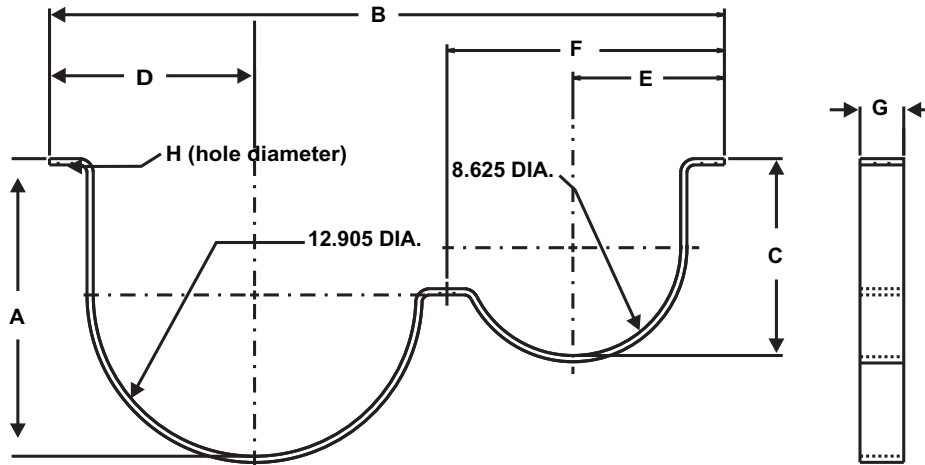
Dimensions for 225-lb. System (P/N 06-236127-001)
